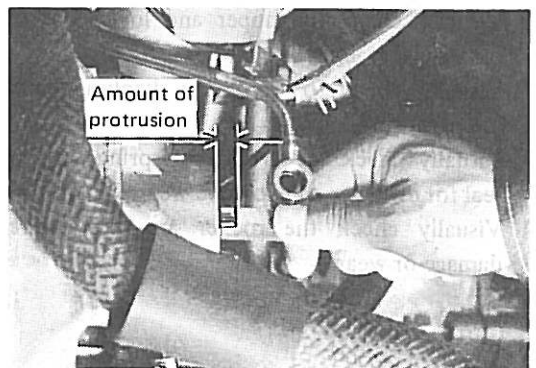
Measuring Amount of Push Rod Protrusion
